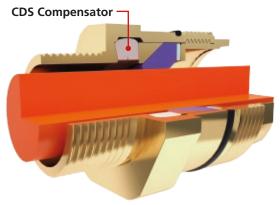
When a larger diameter cable is installed the inner compensator operates to a greater extent.
